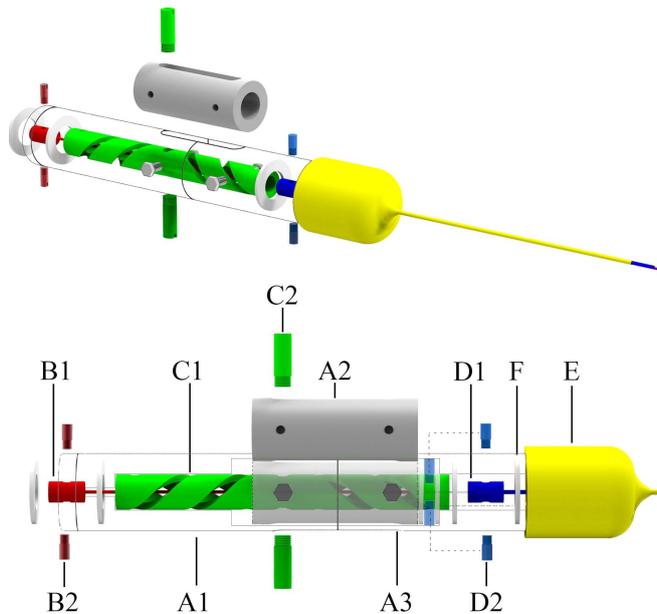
Biopsy Needle Handle Design—Exploded View. Top row: perspective view, Bottom row: side view. Letter indications: (A1): bottom tube, (A2): middle tube, (A3): top tube, (B1): inner bearing connected to the inner cutting blade, (B2): cylindrical protrusions, (C1): helical tube, (C2): control rods (2x), (D1): outer bearing connected to the outer cutting blade, (D2): cylindrical protrusions, (E): cap connected to the cannula, and (F): nylon rings (4x).
